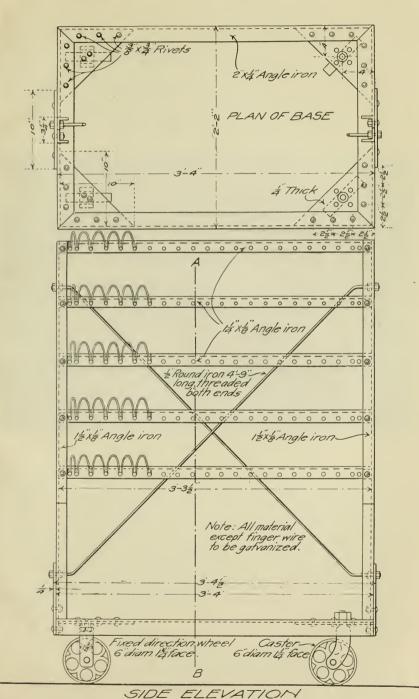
Working drawing of angle-iron cooling rack to hold 100 fowls. Side elevation.
